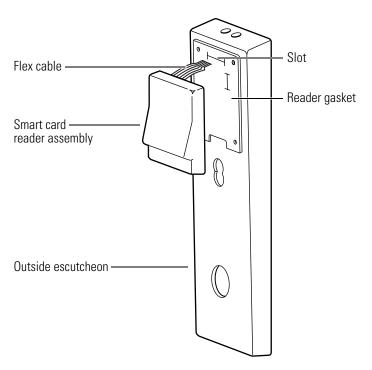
Positioning the B.A.S.I.S. smart card reader assembly
